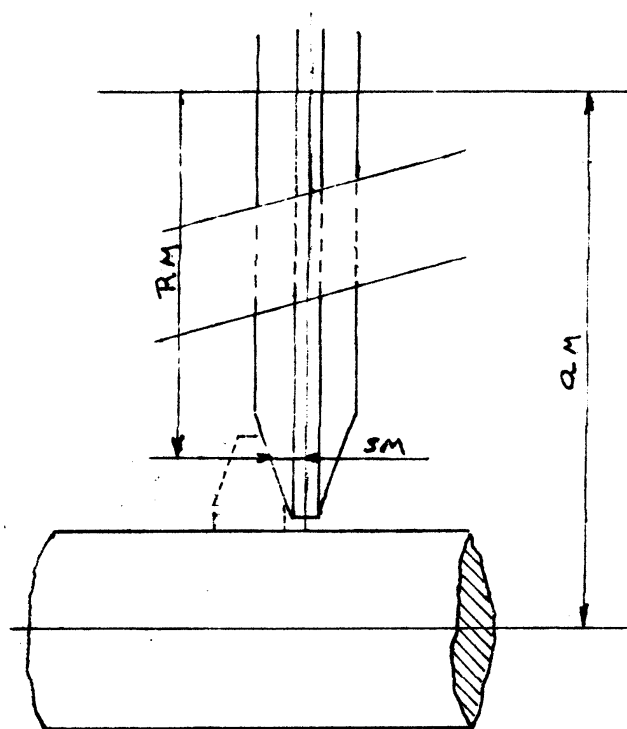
Grinding wheel coordinates for relief grinding of cutter right flank.
